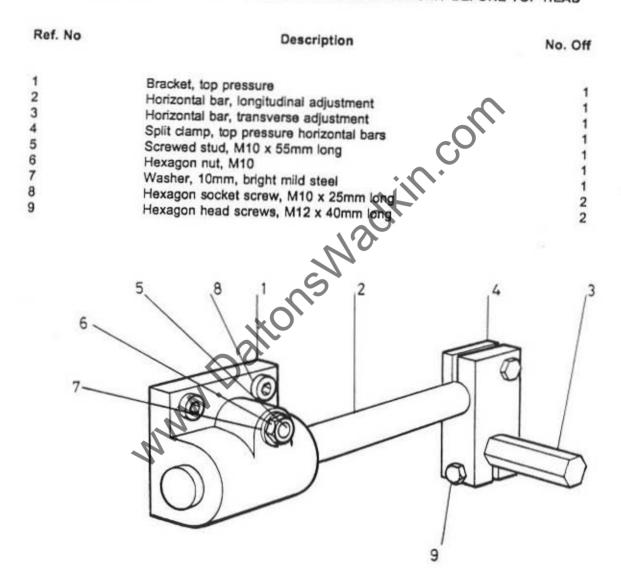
MOUNTING FOR TOP PAD OR ROLLER PRESSURE UNIT BEFORE TOP HEAD
